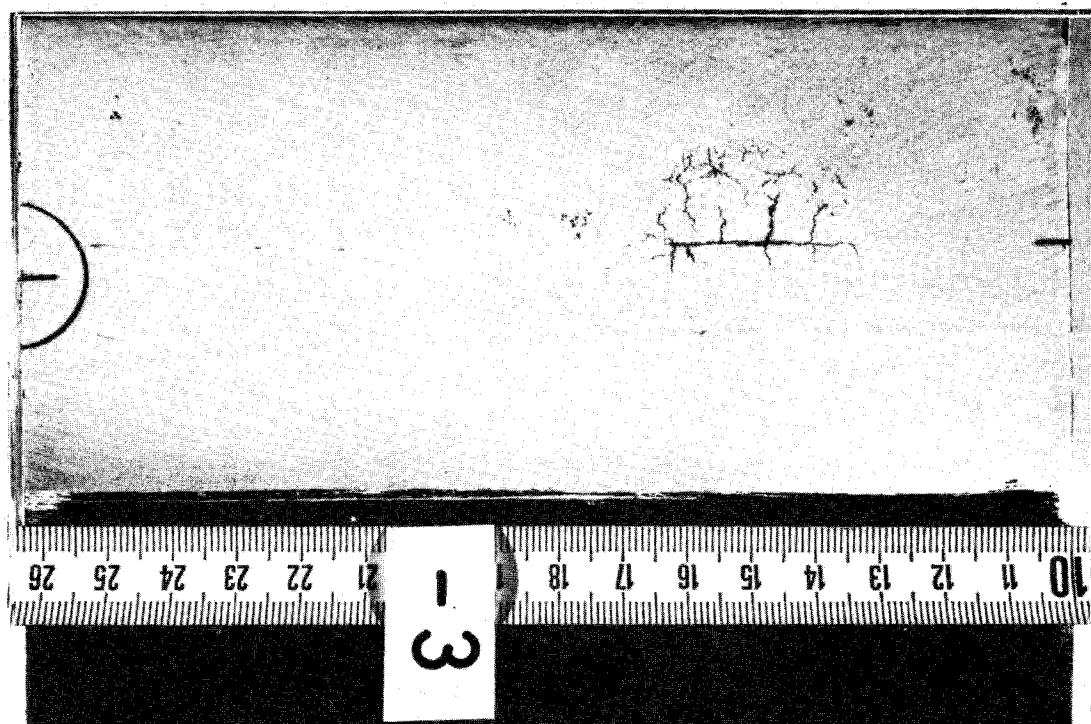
Specimen No. 3 : crack offset : + 2 mm
